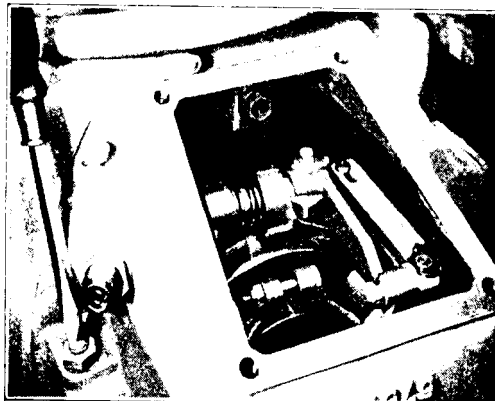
Anti-Backlash Adjustment—Capitol 1E Reverse Gear
